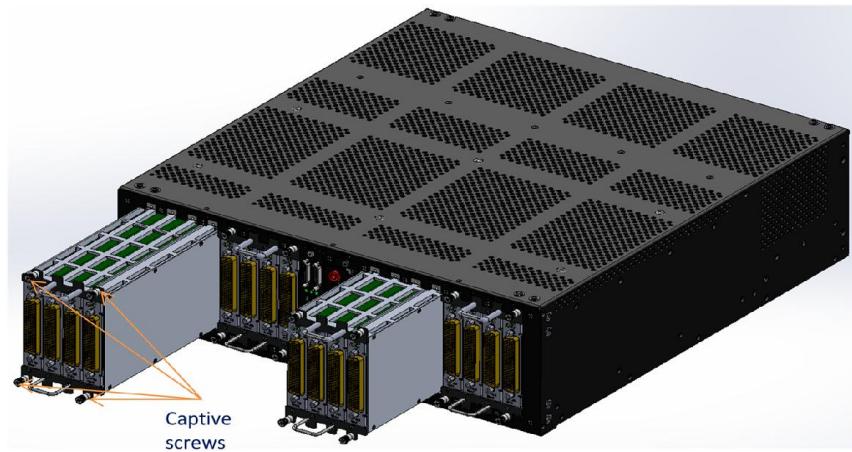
EX1200-SMP4 MODULE IN EX1268A CHASSIS DIAGRAM
